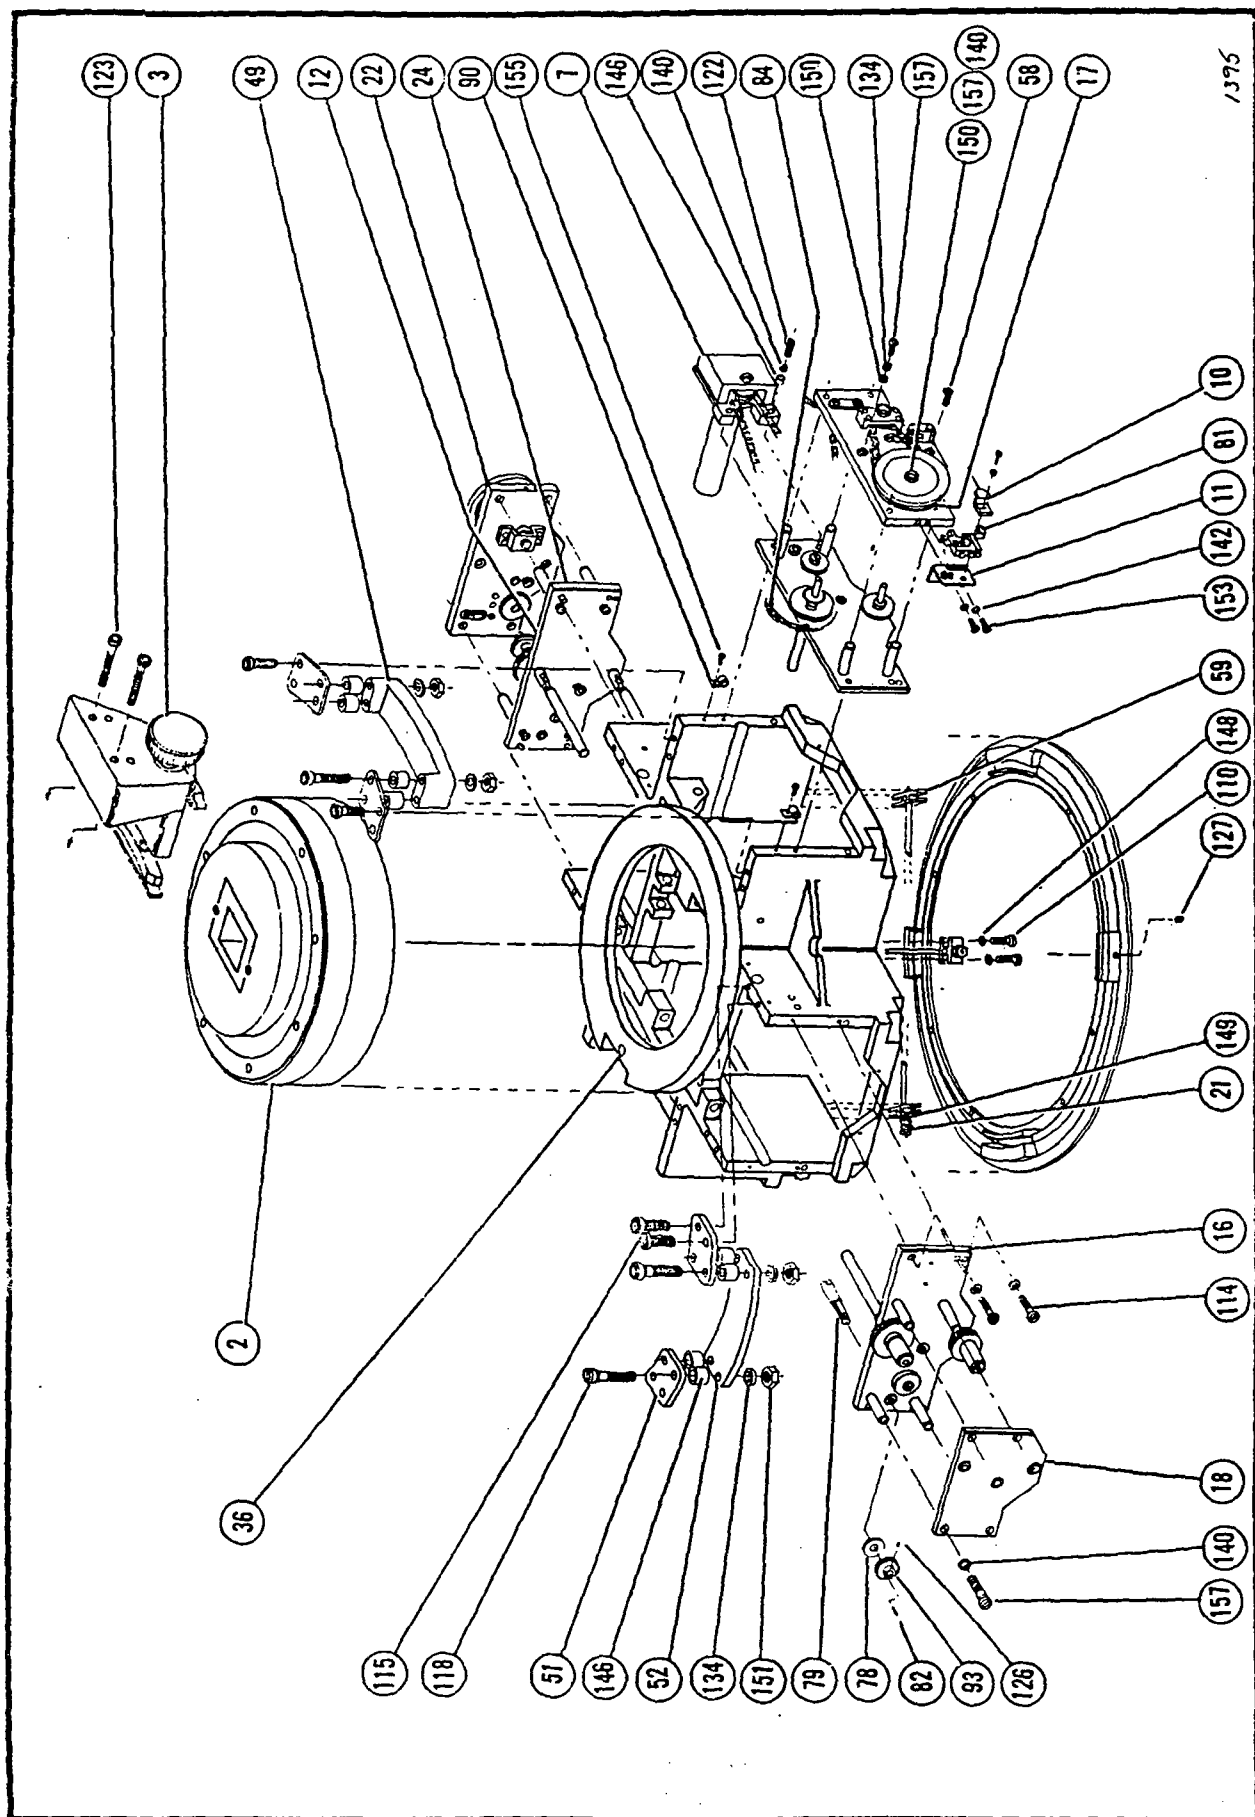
COBALT THERAPY COLLIMATOR - Part No. 3706D (1 of 3)
